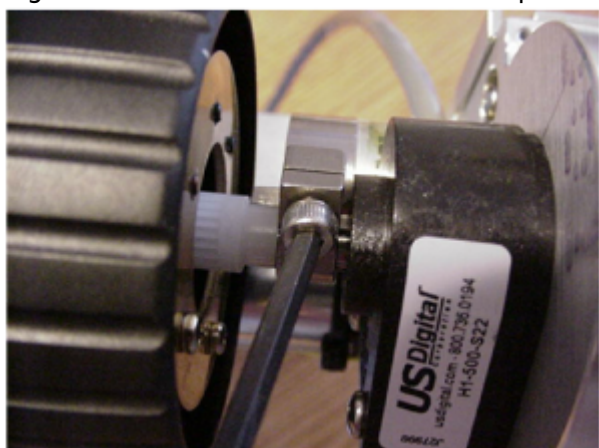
While holding drive shaft clamp in place securely tighten the drive shaft clamp. This clamp must be securely tightened or slippage may occur.
